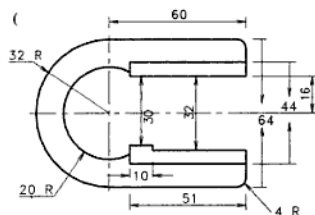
Go-no-go gauge (Wrong dimensioning).
